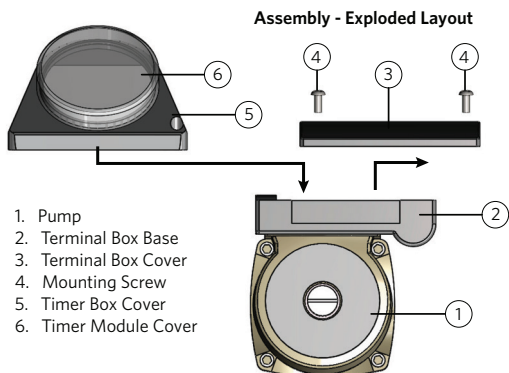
Astro 2 series circulator and 24-hour timer assembly drawing
